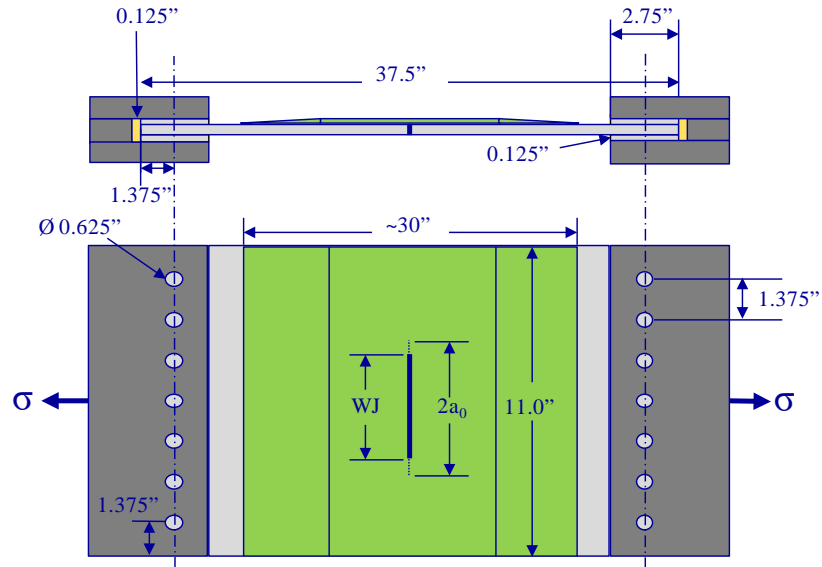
Large scale CCT test specimen geometry and dimensions.
